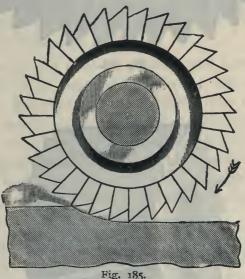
represents a side view of a face or straddle mill in operation; the direction of the motion of the tool is shown by the arrow—the movement of the work being from the left hand to the tool. 186
